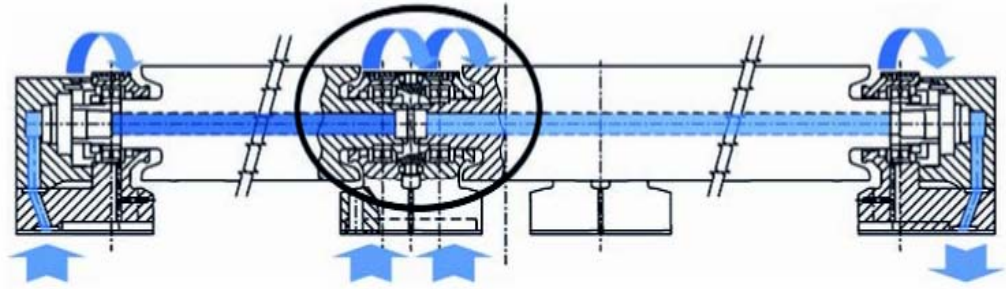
Roll bearing supports and caster rolls internally water cooled.
